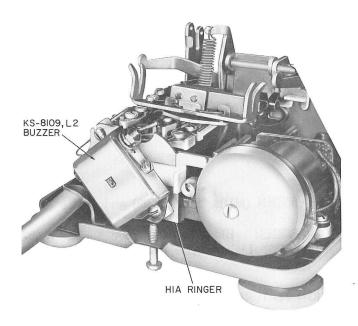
KS-8109L2 Buzzer Mounted in 568HN (MD)
